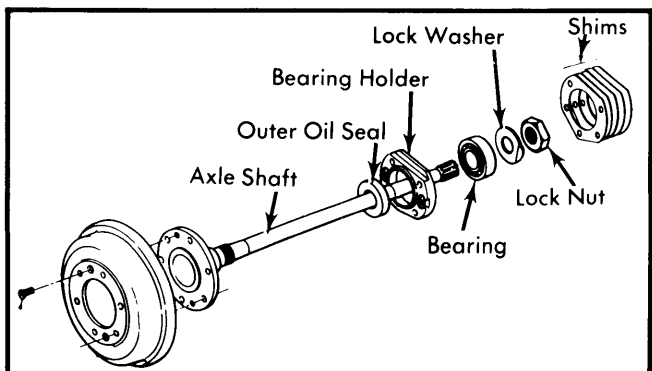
Exploded View of Rear Axle Shaft Assembly
